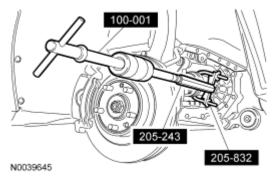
Identifying Special Tools (100-001, 205-243 And 205-832) Courtesy of FORD MOTOR CO.
